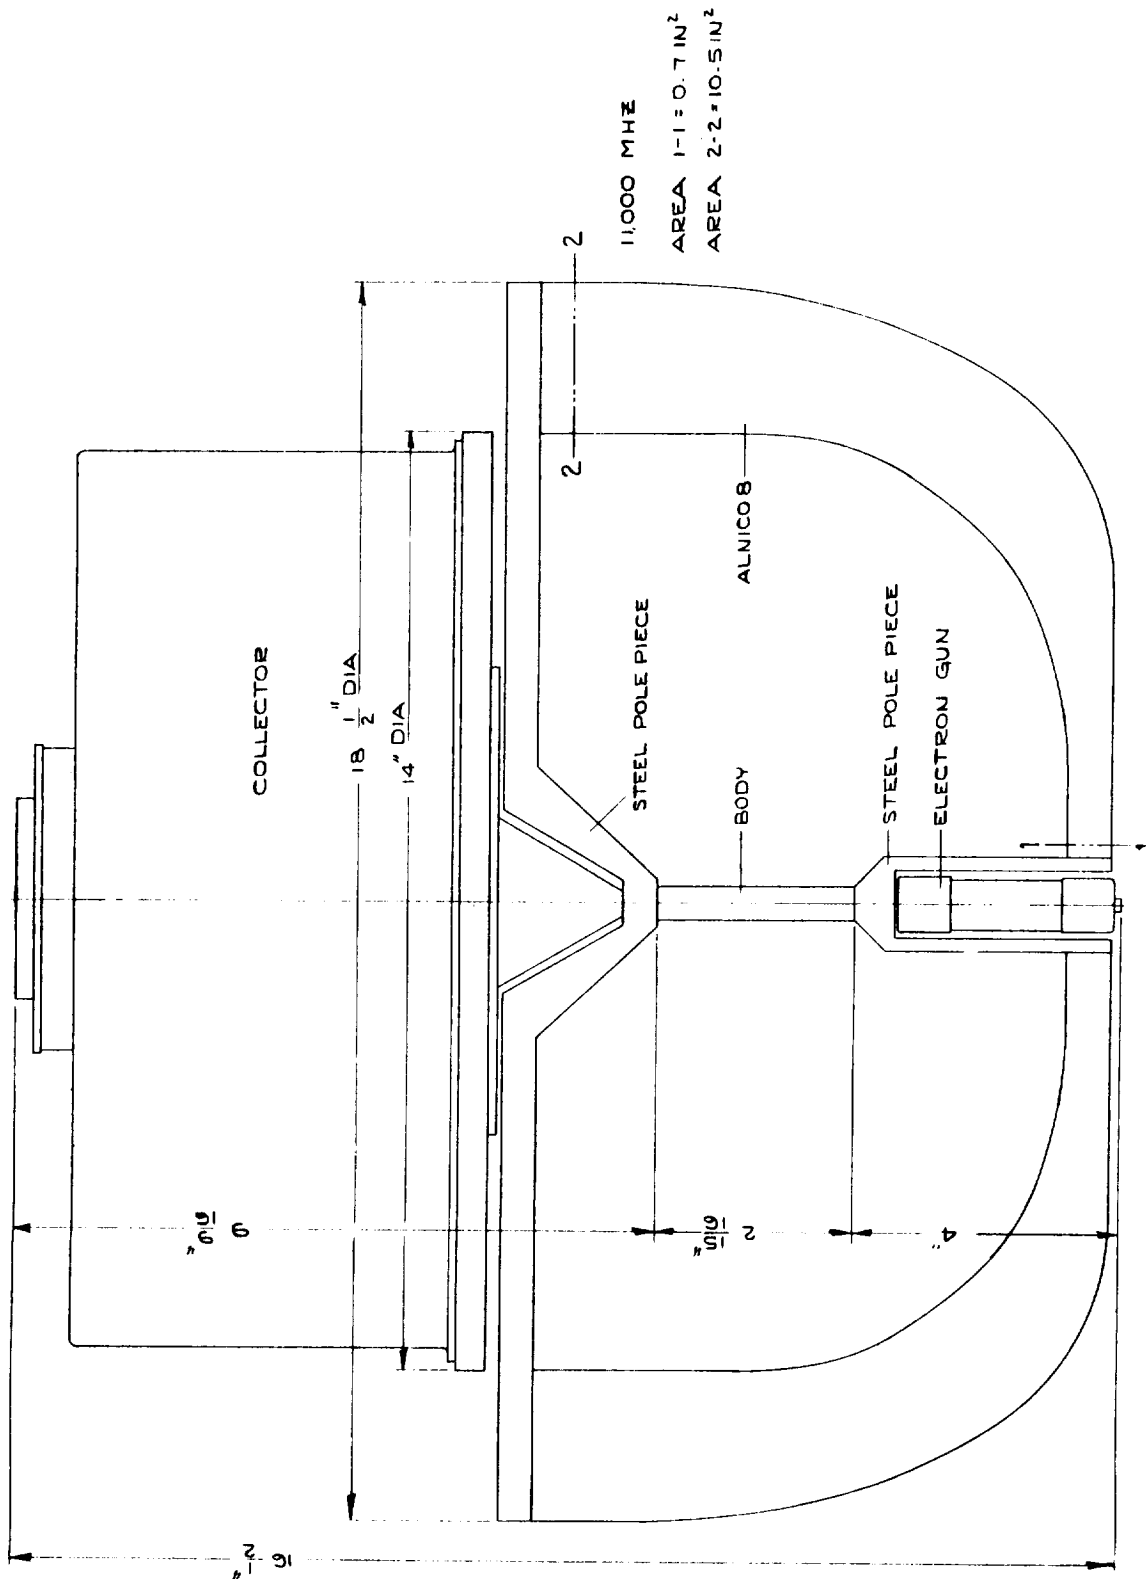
Cutline Sketch of 11,000-MHz FM Klystron and Permanent Magnet Assembly
